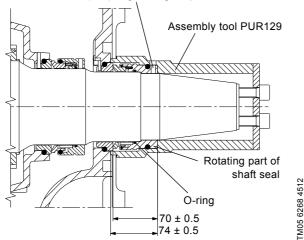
Fitting the rotating part of primary shaft seal in range 78 pumps.
